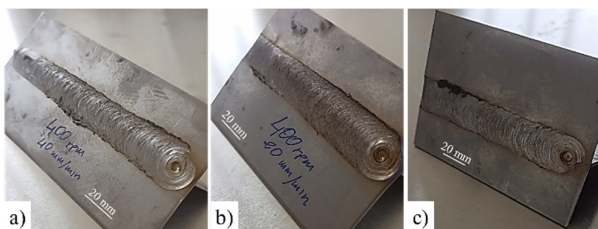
experimental test using single shoulder tool for 400 rpm and (a) 40
